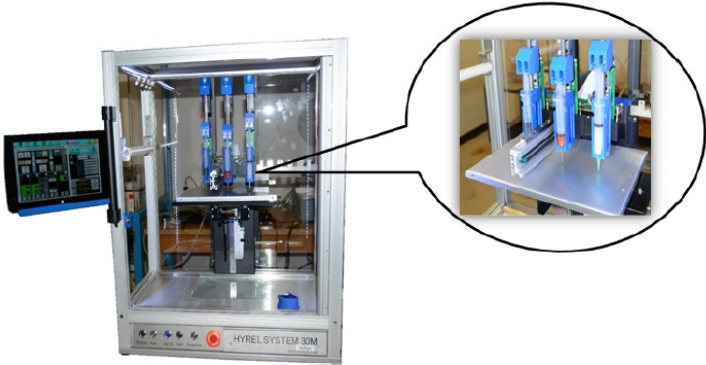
The Multi-Extruder Paste-Extrusion 3D Printer [91]
